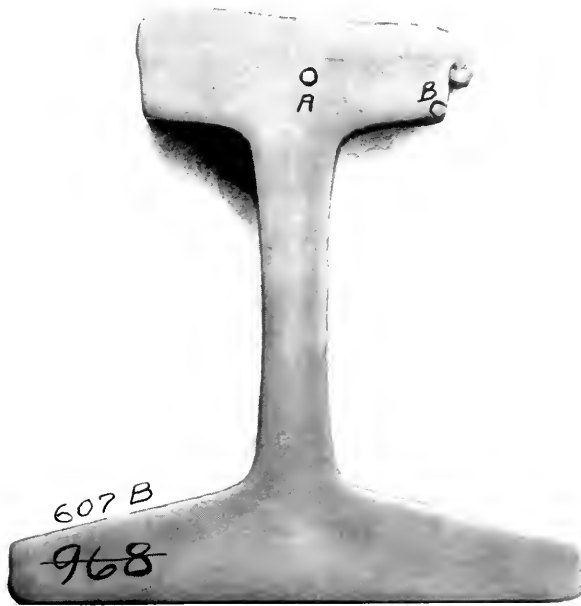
B. LIGHT ETCHING OF RAIL 607.
